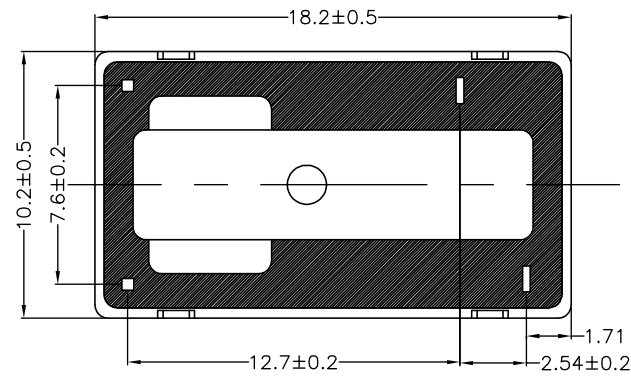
FIGURE FOR PRINTED CIRCUIT BOARD PROCESSING (BOTTOM VIEW)
